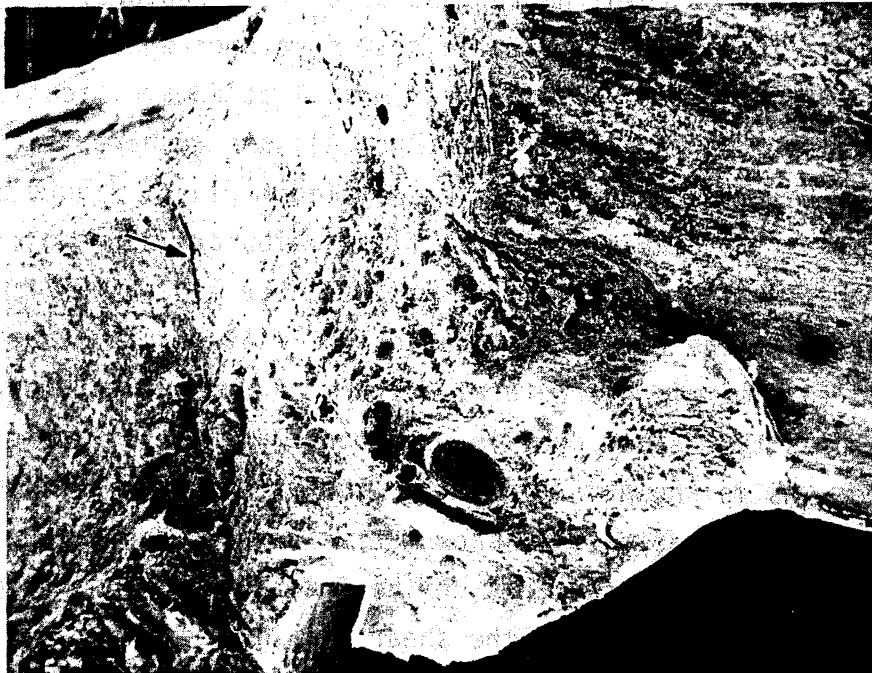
CRACK EXTENDING CIRCUMFERENTIALLY IN THE FILLET WELD ON THE DRAIN-END SIDE OF THE DRAIN-END STIFFENER RING
